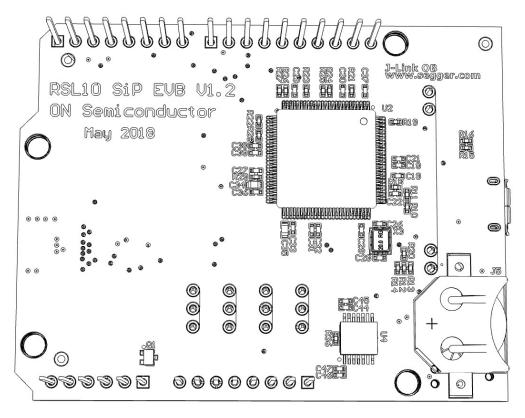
Three-Dimensional Line Drawing of the Board (Bottom View)
